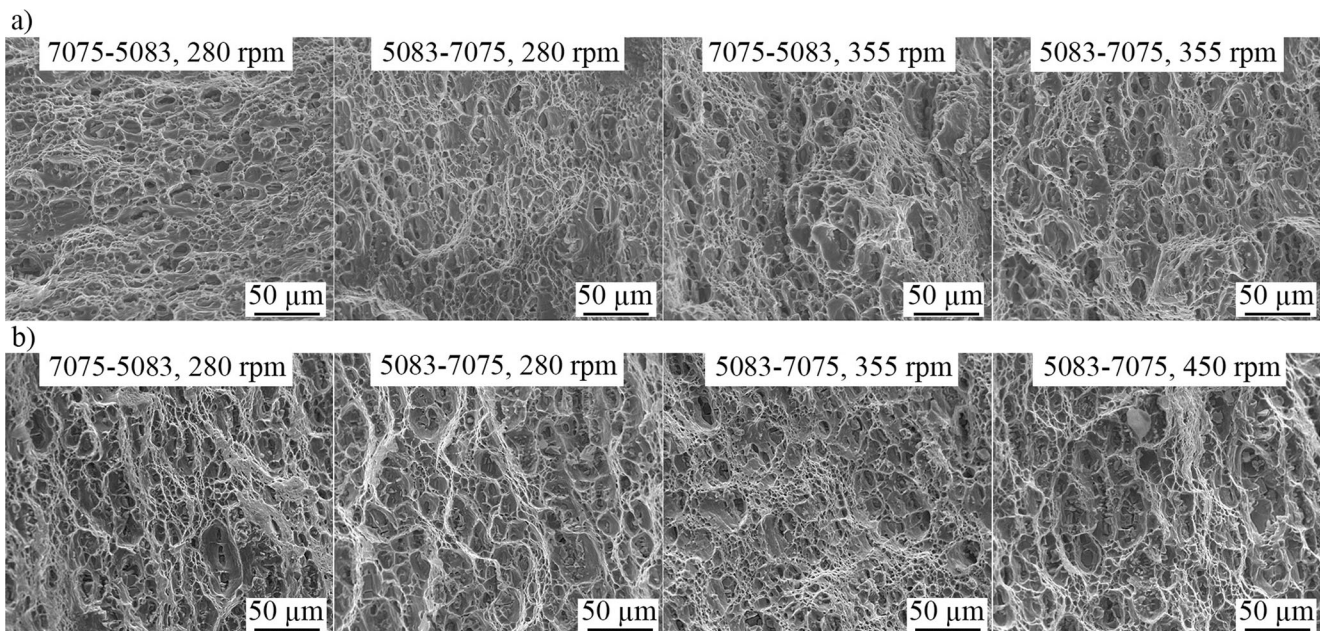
The SEM microphotographs of fracture surface of tensile specimens for defect-free welds. a Triflute pin. b Threaded taper pin
